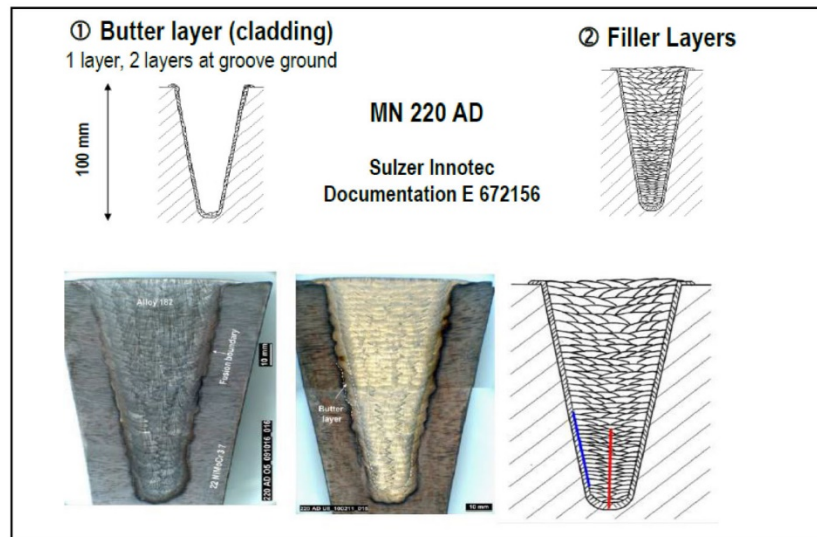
Welding specification for buffer and filler layers; Macro-etching of weld and schematic of crack configurations.
